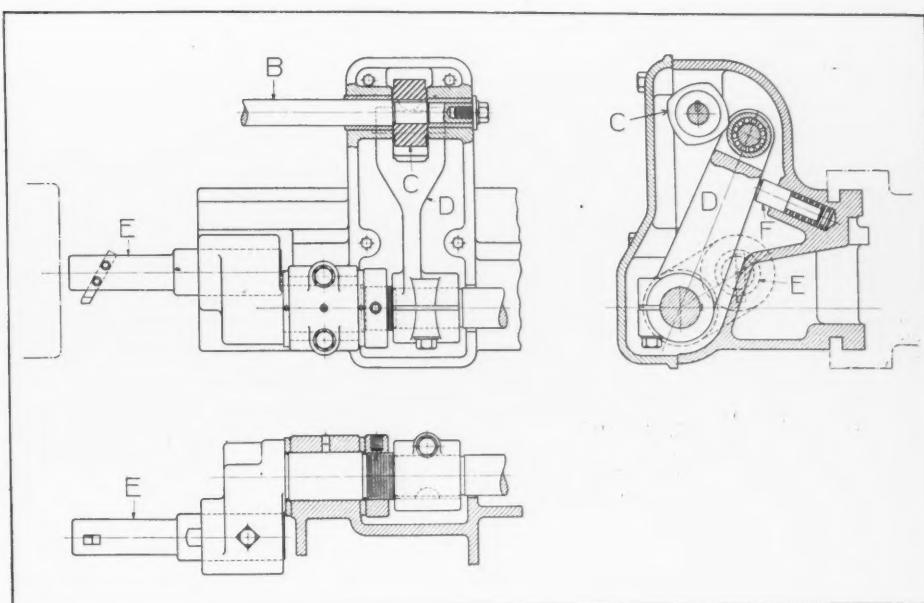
Construction of the Boring Unit used for finishing the Crankpin Hole Bearing in Connecting-rods
